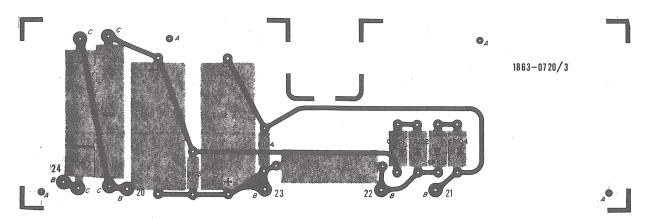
Type 1863 rectifier circuit etched-board assembly (P/N 1863-2720)
